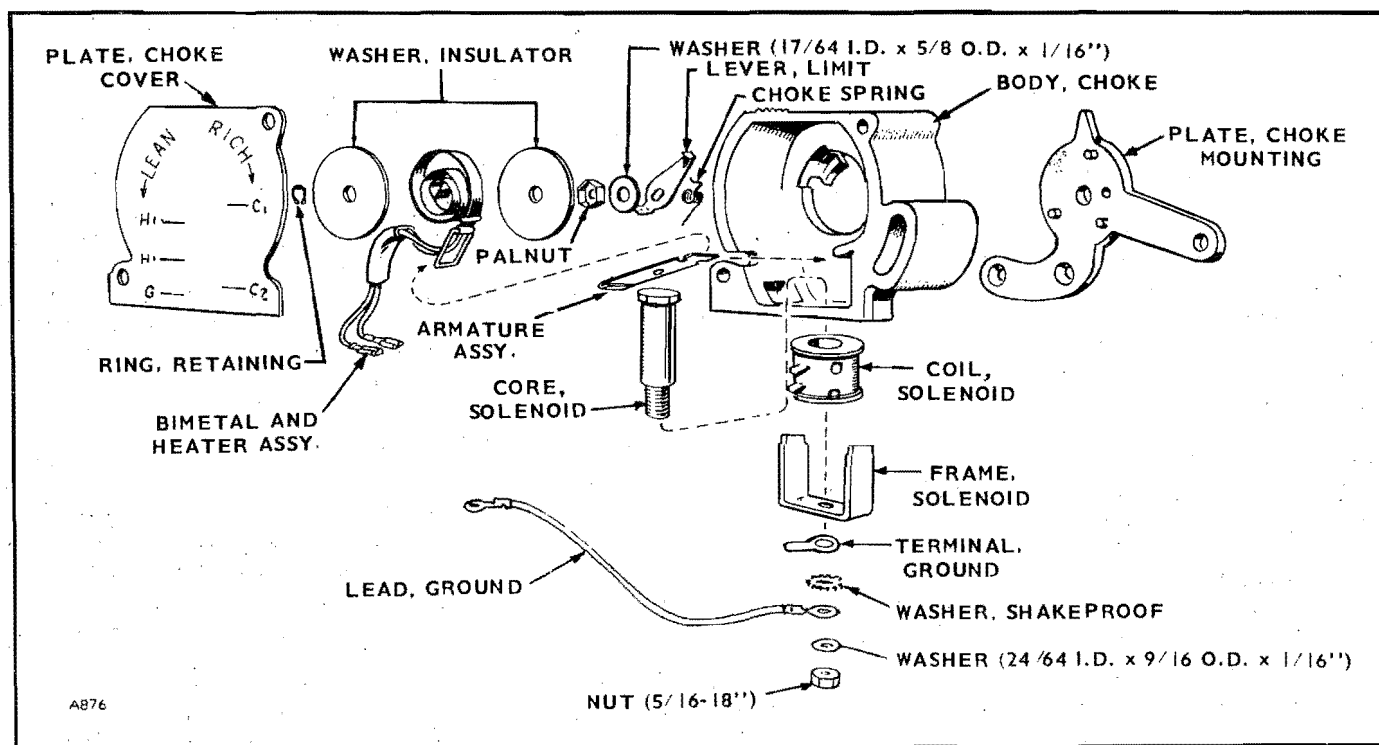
THERMO-MAGNETIC CHOKE ASSEMBLY
